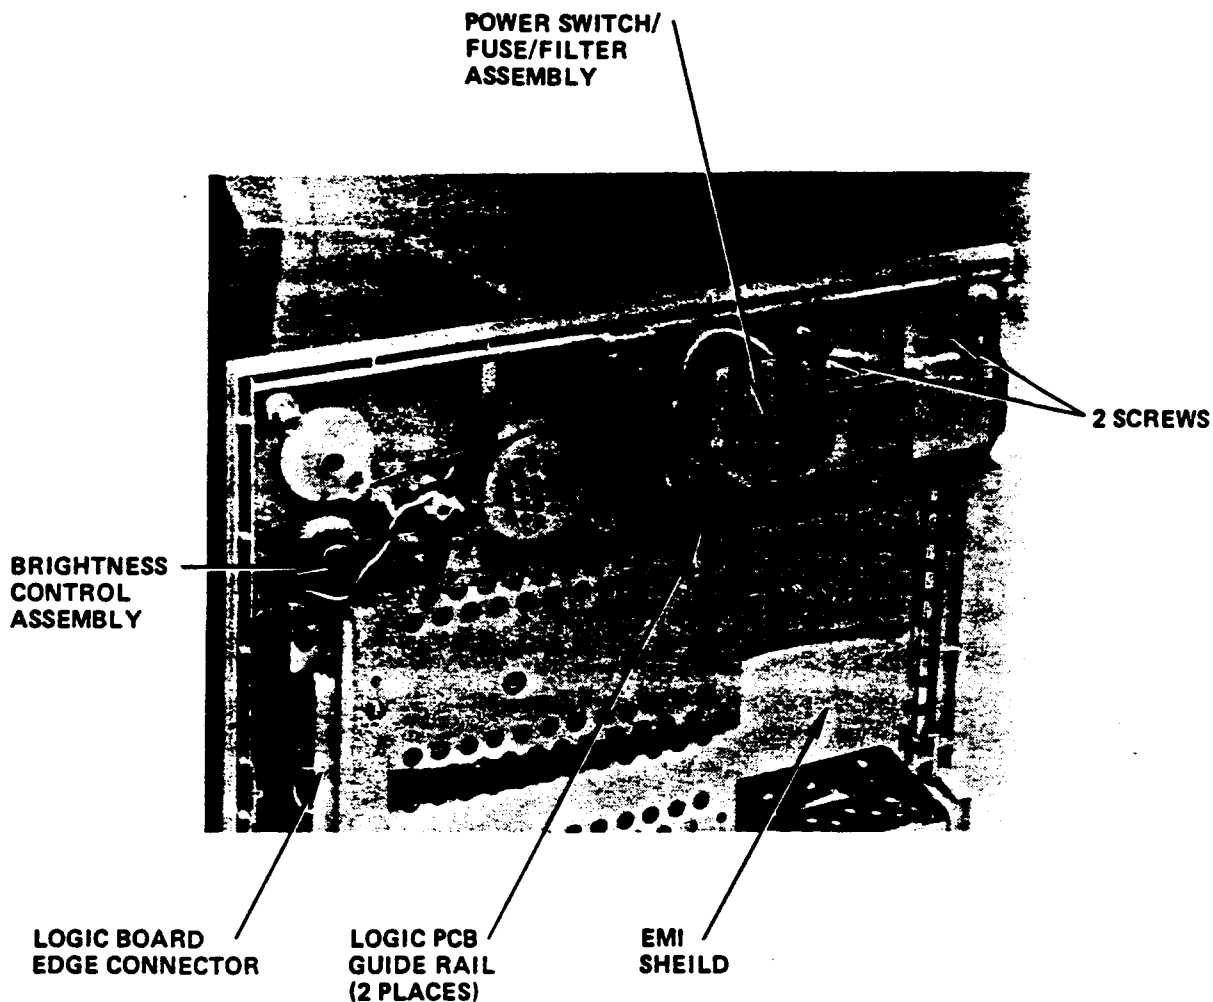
Removing and Replacing the Brightness Control Assembly and the Power Switch/Fuse/Filter Assembly
